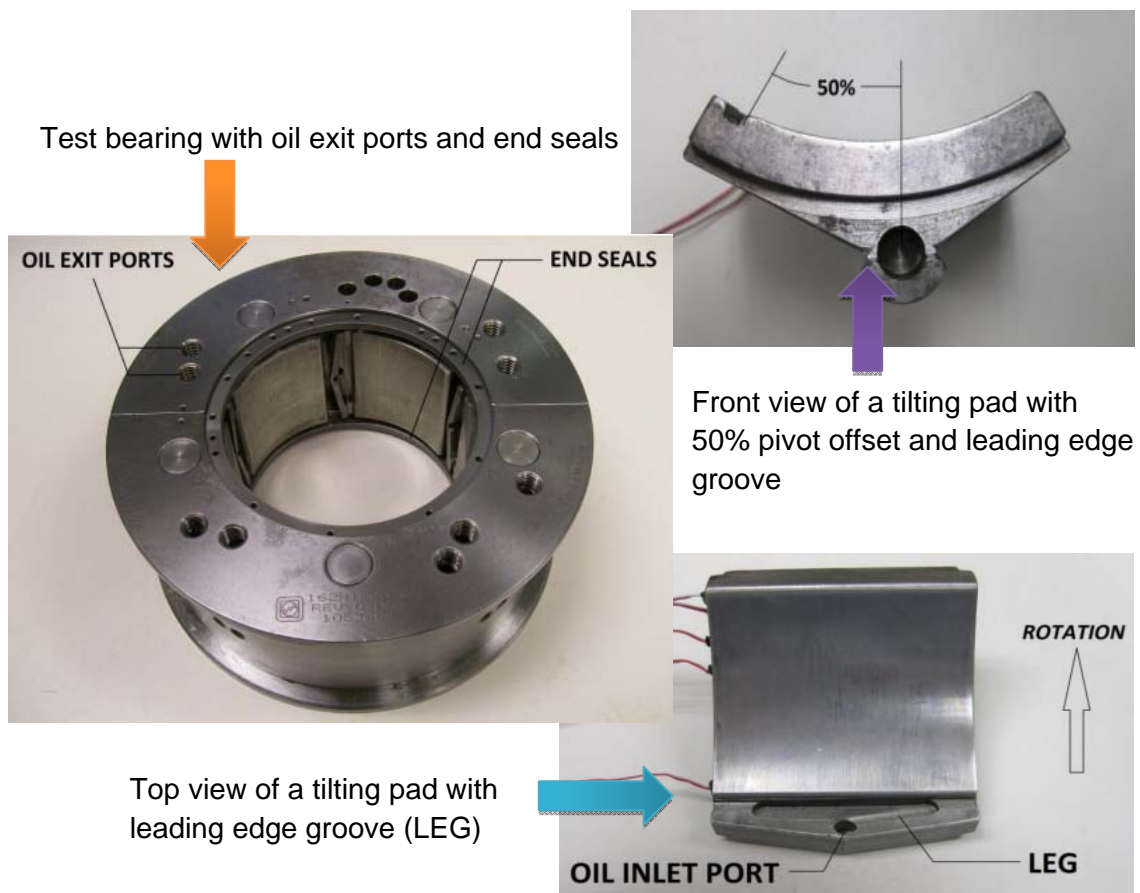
Photographs of a test TPJB with leading-edge-groove pads in Ref. [23].
